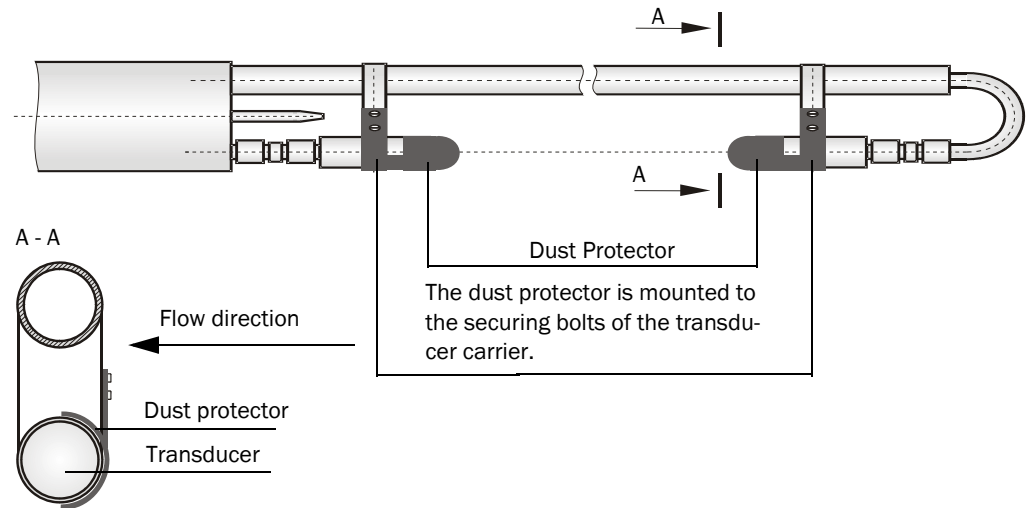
Assembly of the dust protector option to type FLSE100-PR
